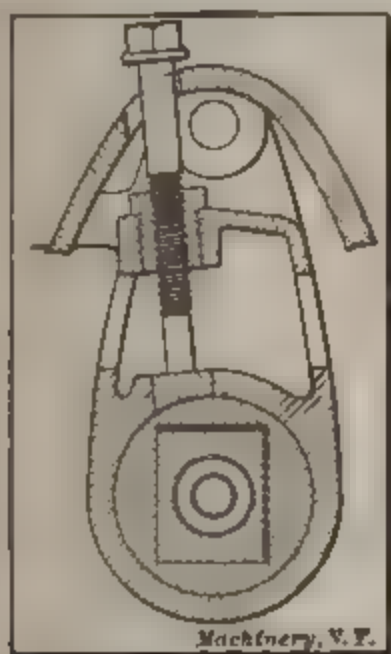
Set-screw with Shoe for Clamping Sleeve
